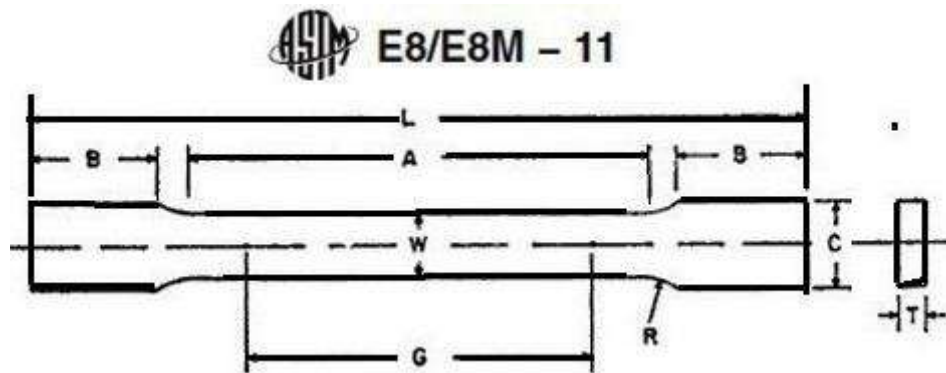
Detail of tensile test specimen as per ASTM [88]
